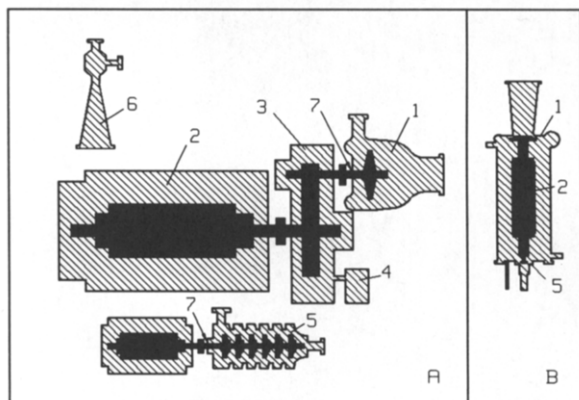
Comparison of ORC-power plant of 100 kW<sub>e</sub> realized (A) with conventional technology and (B) with high-speed technology (same scale). 1 turbine, 2 generator, 3 reduction gear, 4 oil pump, 5 feed pump, 6 vacuum pump, 7 shaft seal.
